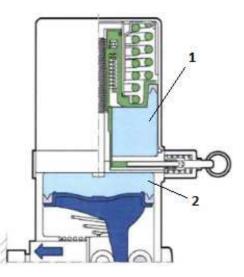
BFC Tread brake actuator with spring loaded parking brake (Faiveley Transport, 2007)
